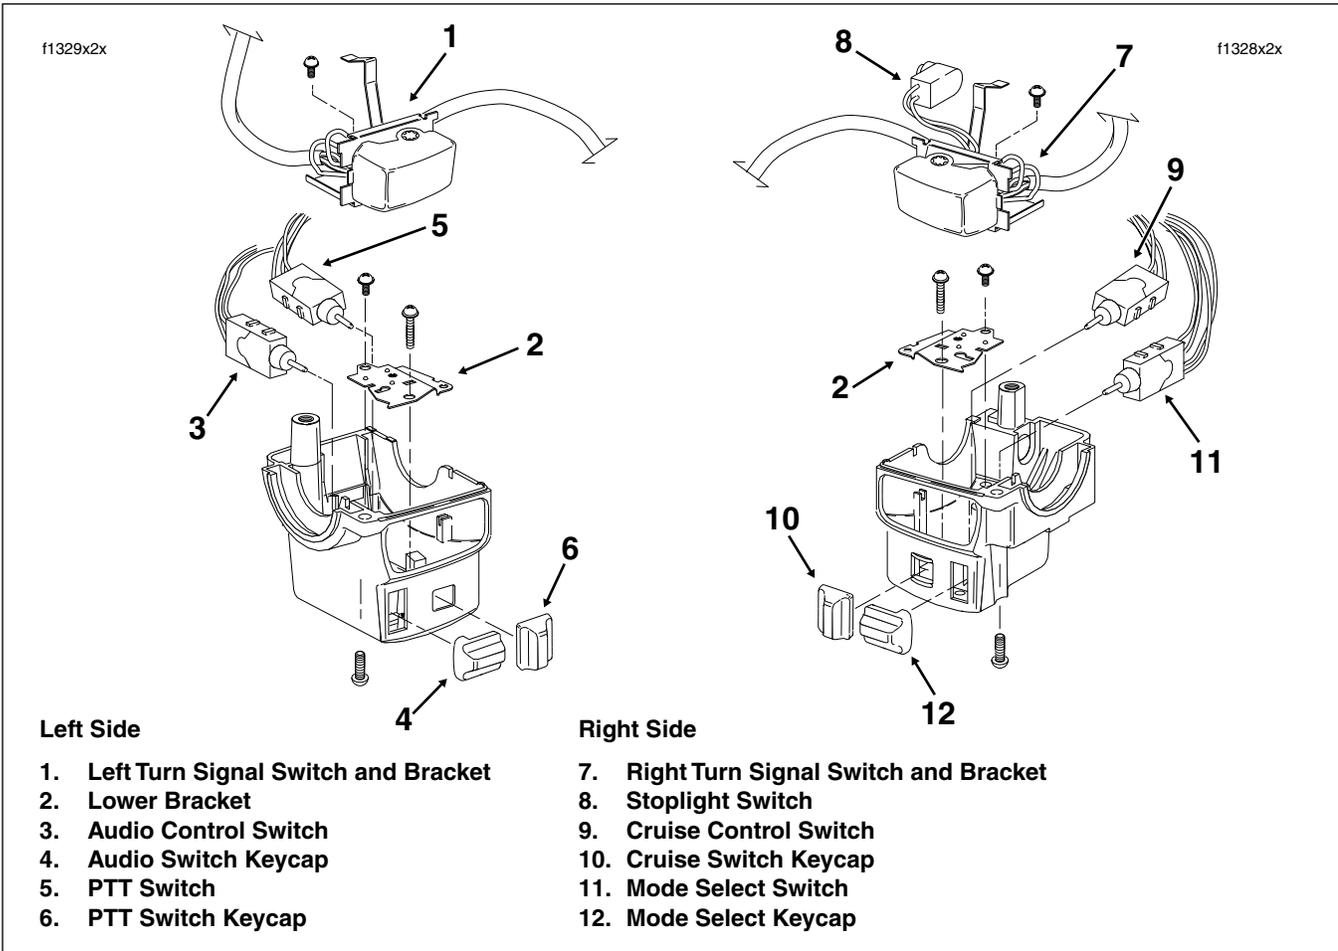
Lower Handlebar Switch Assemblies (Ultra)
